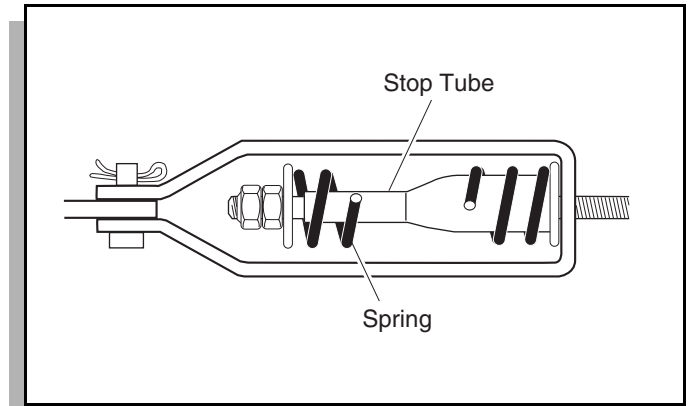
Parking Brake and Kick-Off Mechanism
